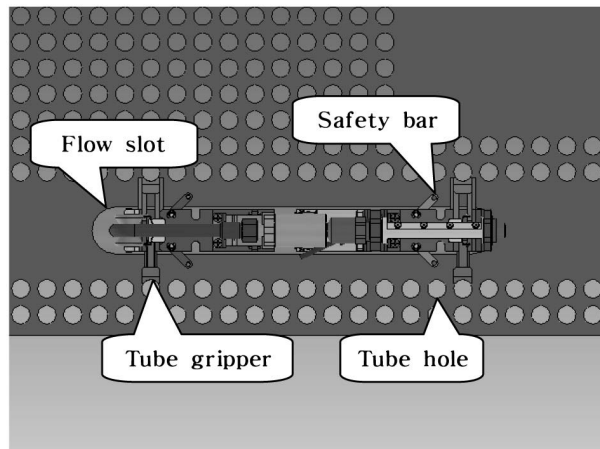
Nozzle Head Assembly on the Tube Support Plate
